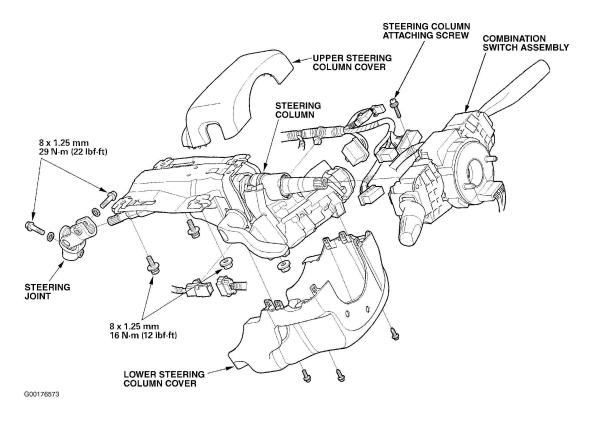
Exploded View Of Steering Column (RSX) Courtesy of AMERICAN HONDA MOTOR CO., INC.
